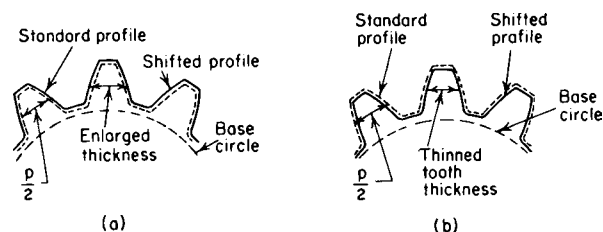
Geometry of profile-shifted teeth. (a) Enlarged case; (b) thinned tooth thickness case.
